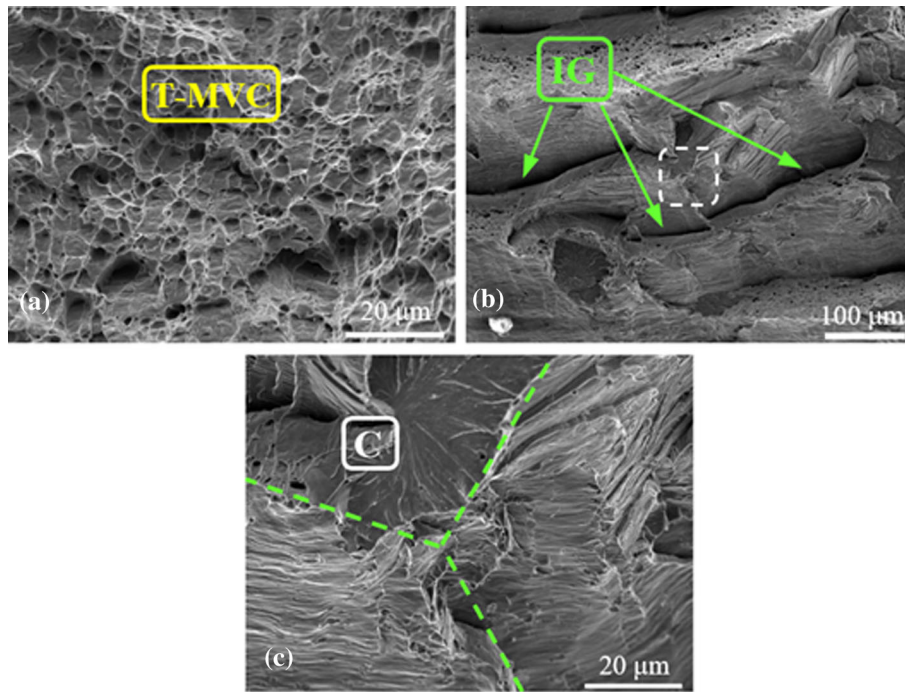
Fracture morphology of hot-rolled specimen. (a) Uncharged, (b) Hydrogen charging and (c) high-magnification image of the white wire frame in (b)
